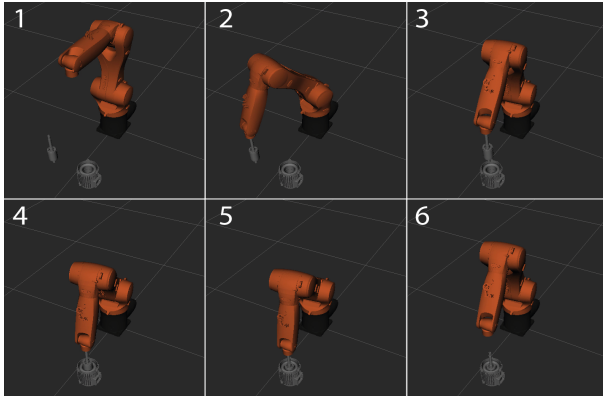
Assembly sequence, frames 1 and 2 show the part being grasped and lifted above the housing, frames 3-6 show the motion being guided by the assembly constraints for inserting the rotor.
